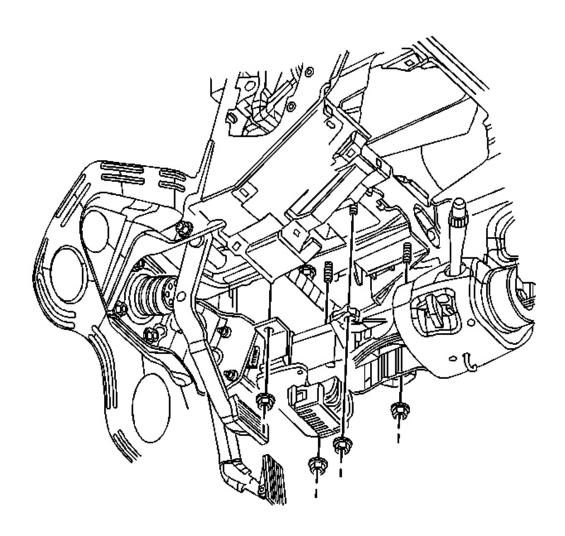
View Of Steering Column Assembly Courtesy of GENERAL MOTORS CORP.
